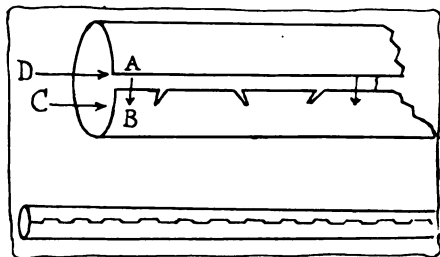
In making a tube from sheet metal the edges are interlocked by slitting one edge and turning sections alternately up and down and pressing the edges together
